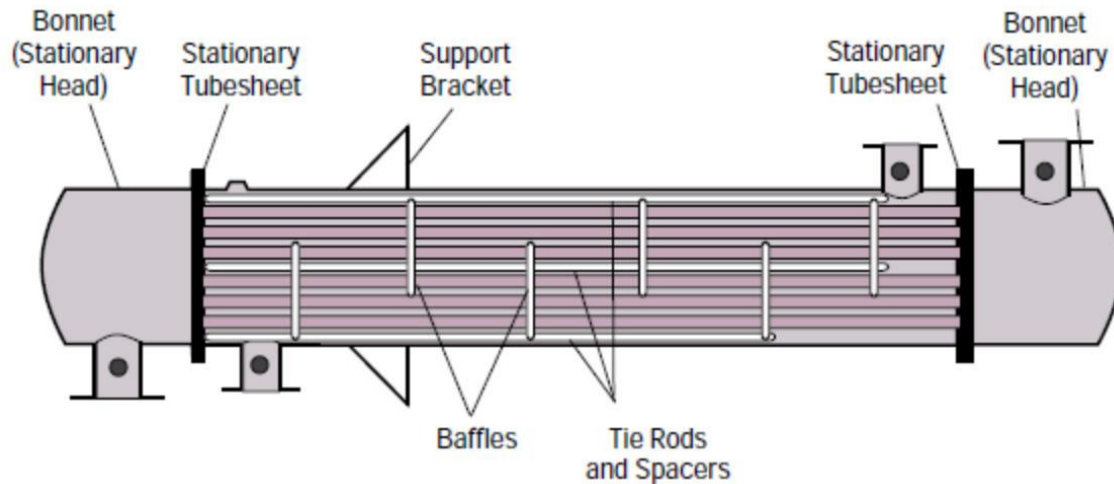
Fixed tube sheet exchanger. (Mukherjee R., 1998)
